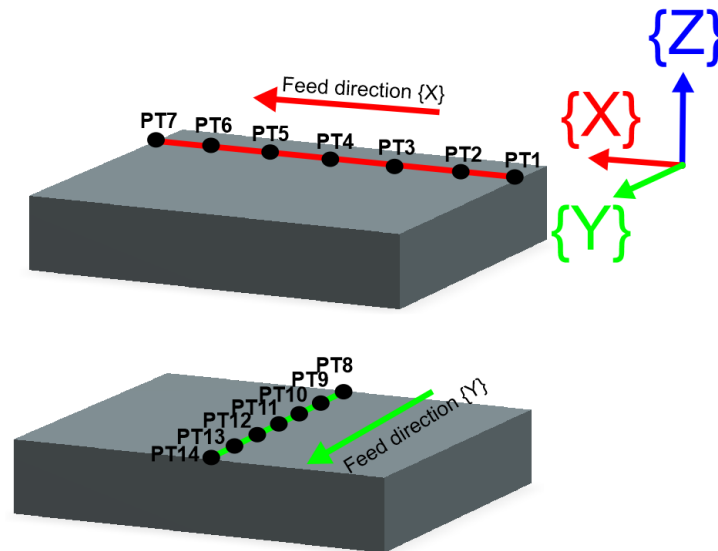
Workpiece and FRF measurement locations on the workpiece
